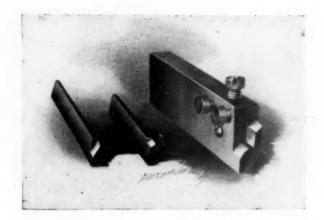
No-Clearance Tool for Standard Engine Lathe Tool Post, with THREE CUTTERS OF DIFFERENT ANGLES
